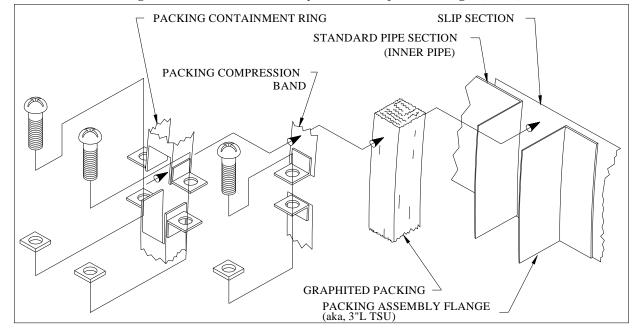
Gasket Band Assembly Parts for Adjustable Length (P-AG)
